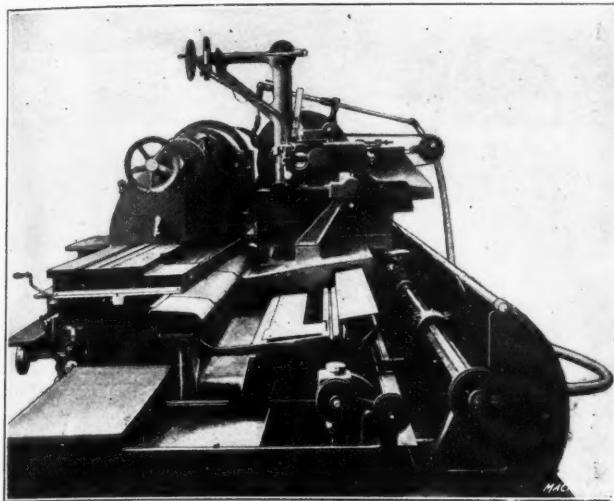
Right-hand End of Roll Grinding Machine showing Driving Shaft
